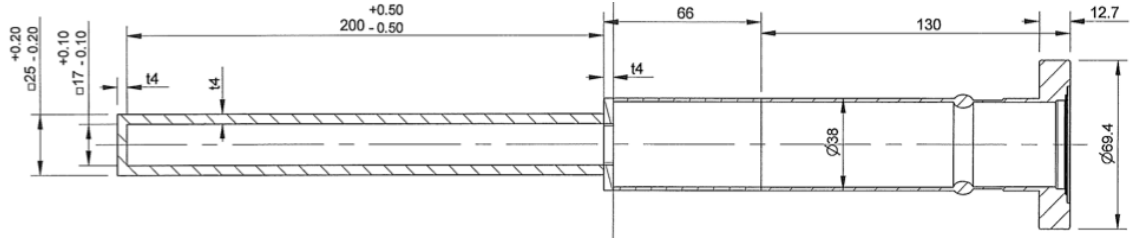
The working drawing used to construct our glass cell (all dimensions in mm). The section on the right is a cylindrical piece which forms the glass-to-metal transition to a CF35 vacuum flange, and the section to the left is cuboidal and formed of 4 rectangular glass plates which have anti-reflection coatings.
